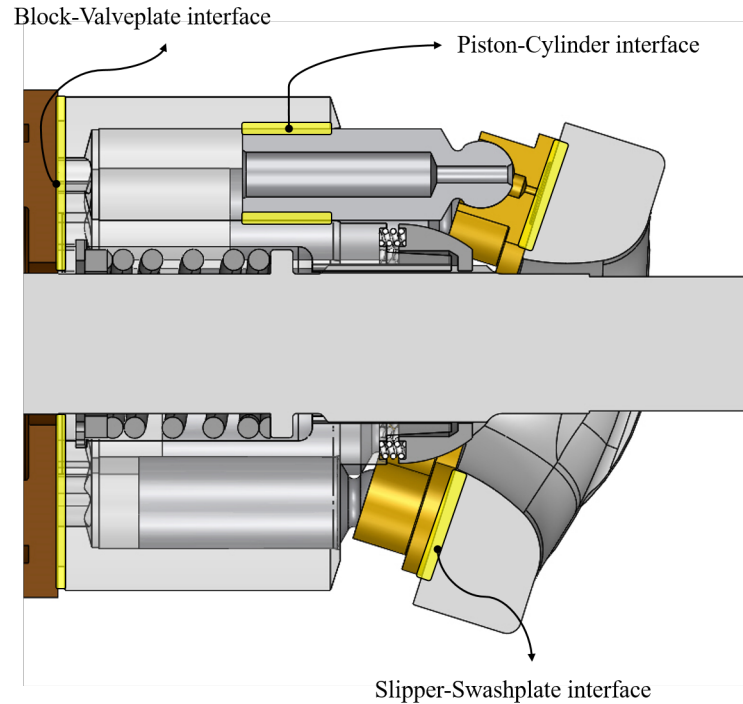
Lubricating interfaces of the axial piston machine
